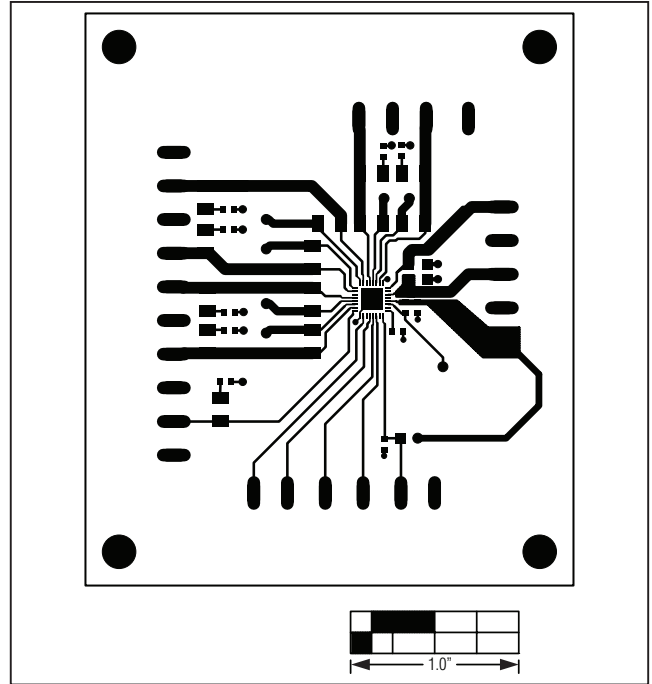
MAX17120 EV Kit PCB Layout—Component Side
